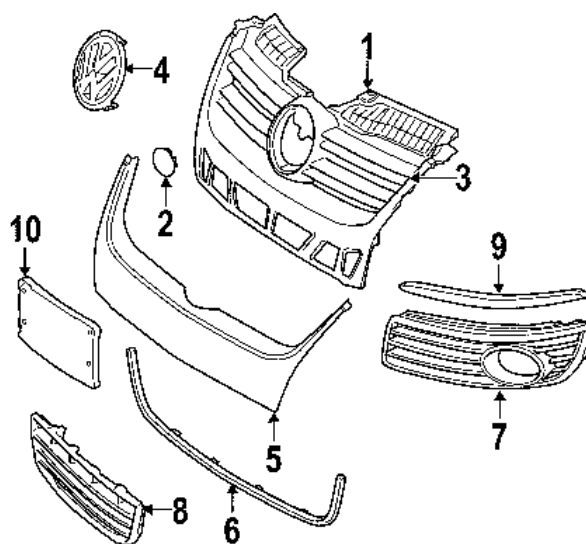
An example of an assembly drawing used in the replacement of car parts (VWvortex 2012)
